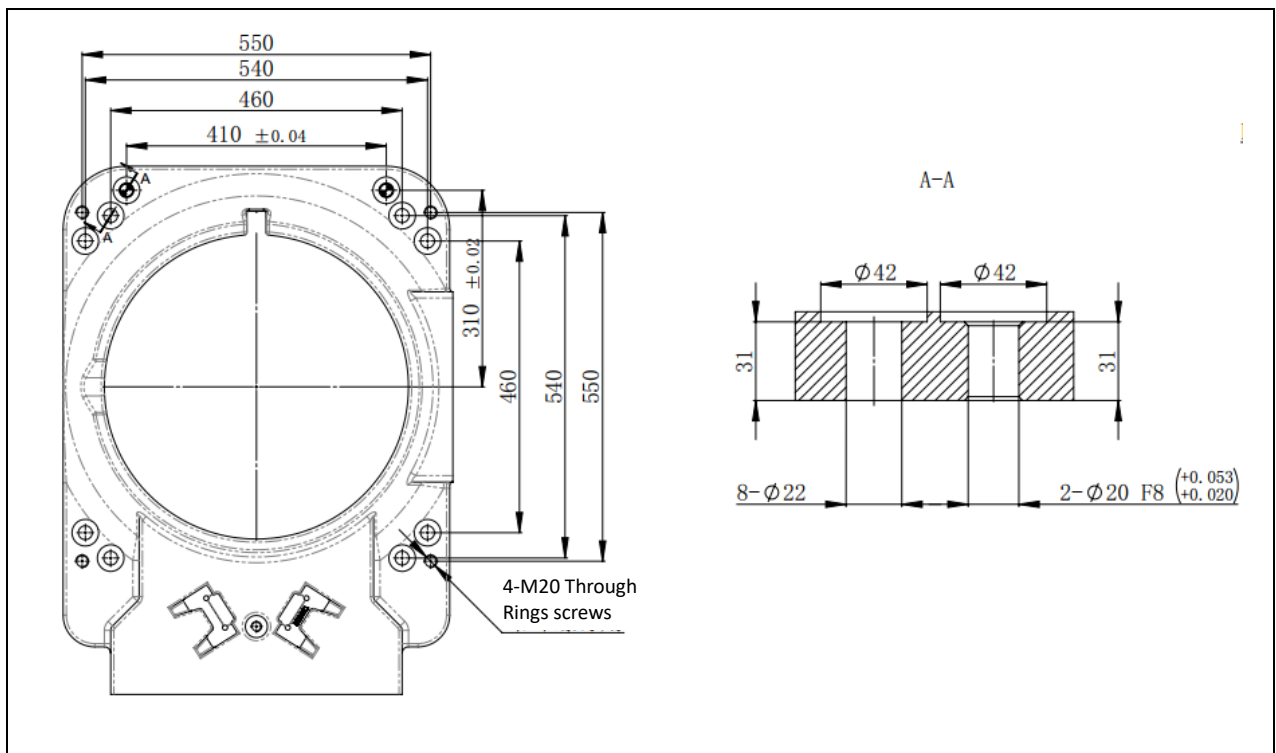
Robot base mounting dimension (ER270-2700)
